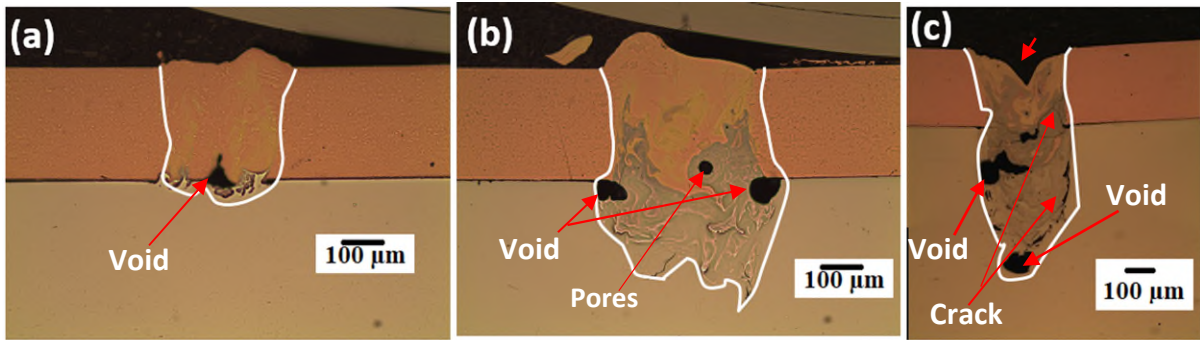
Macro view of the laser welded Cu tab to Al busbar at (a) under-weld, P= 525 W (b) good-weld, P= 825 W and (c) over-weld, P= 1125 W
